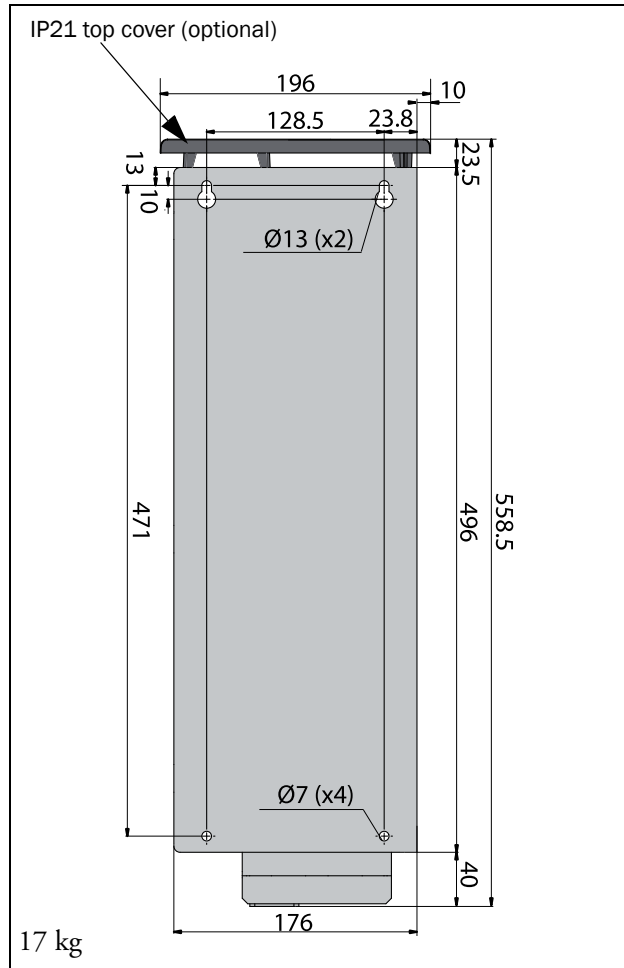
Fig. I Dimensions VFX/FDU model 48-025 to 48-045 (Size C2), backside view.
